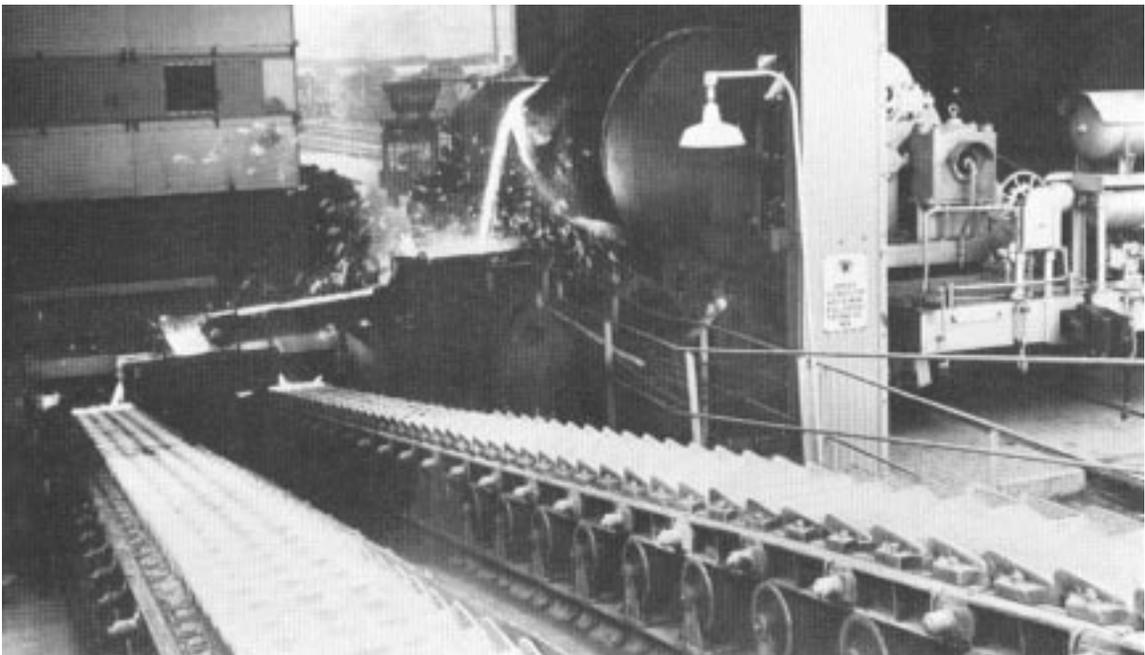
View of a pig casting machine in operation, showing hot metal being divided into two streams by the split runner to simultaneously fill the molds in each of the two strands.
